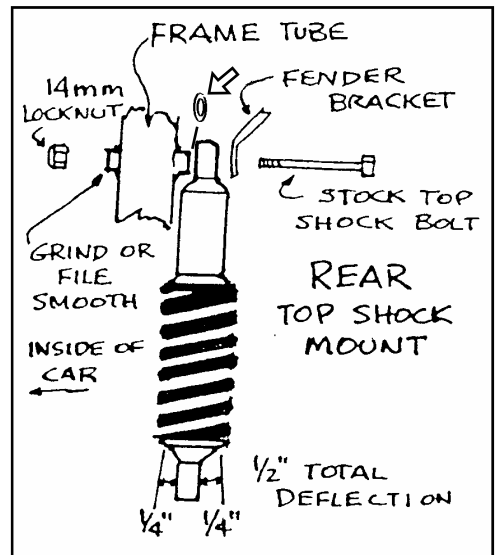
Deflection at bottom of shock is necessary to prevent bending or
